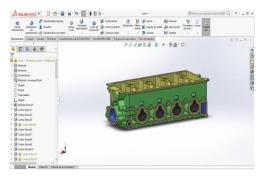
Complete graphic of modified cylinder head in Solidworks.
